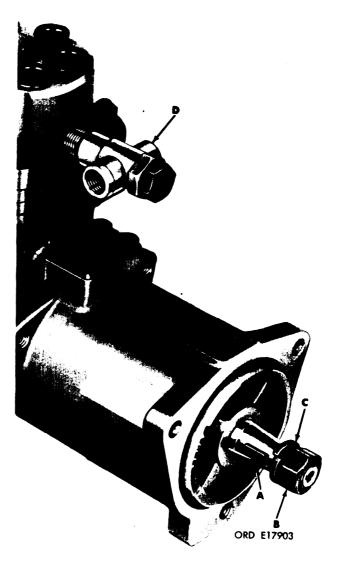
Removing overflow valve assembly (early code G pumps).
